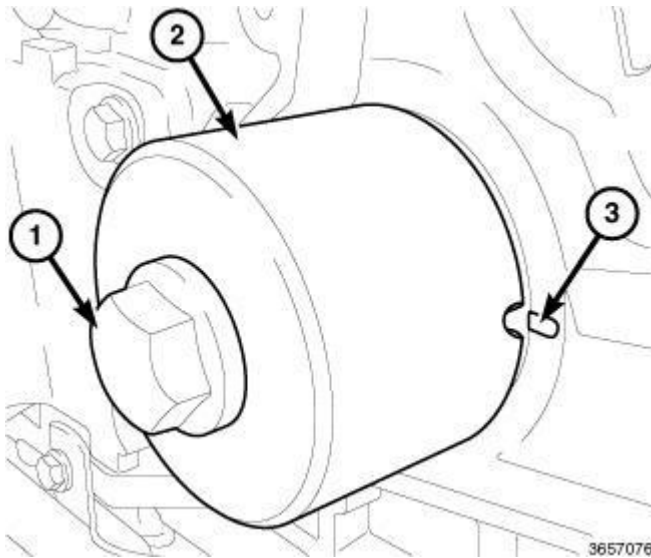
Front Crankshaft Oil Seal Installer & Bolt
